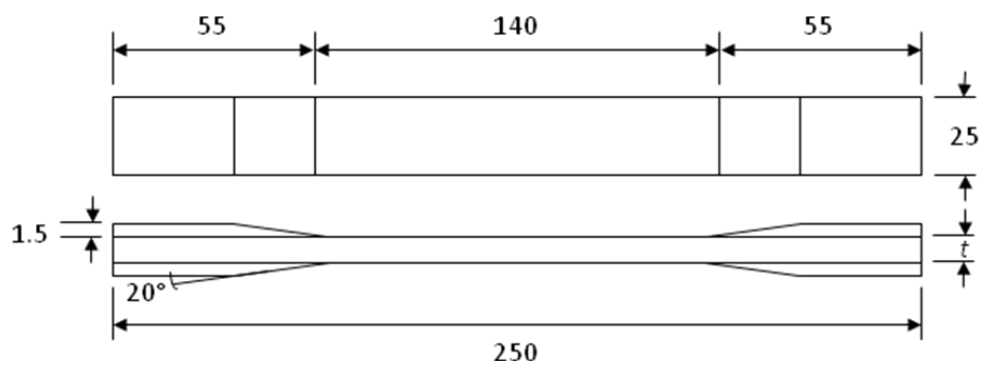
GFRP flat coupon specimen drawing (dimensions in mm).
